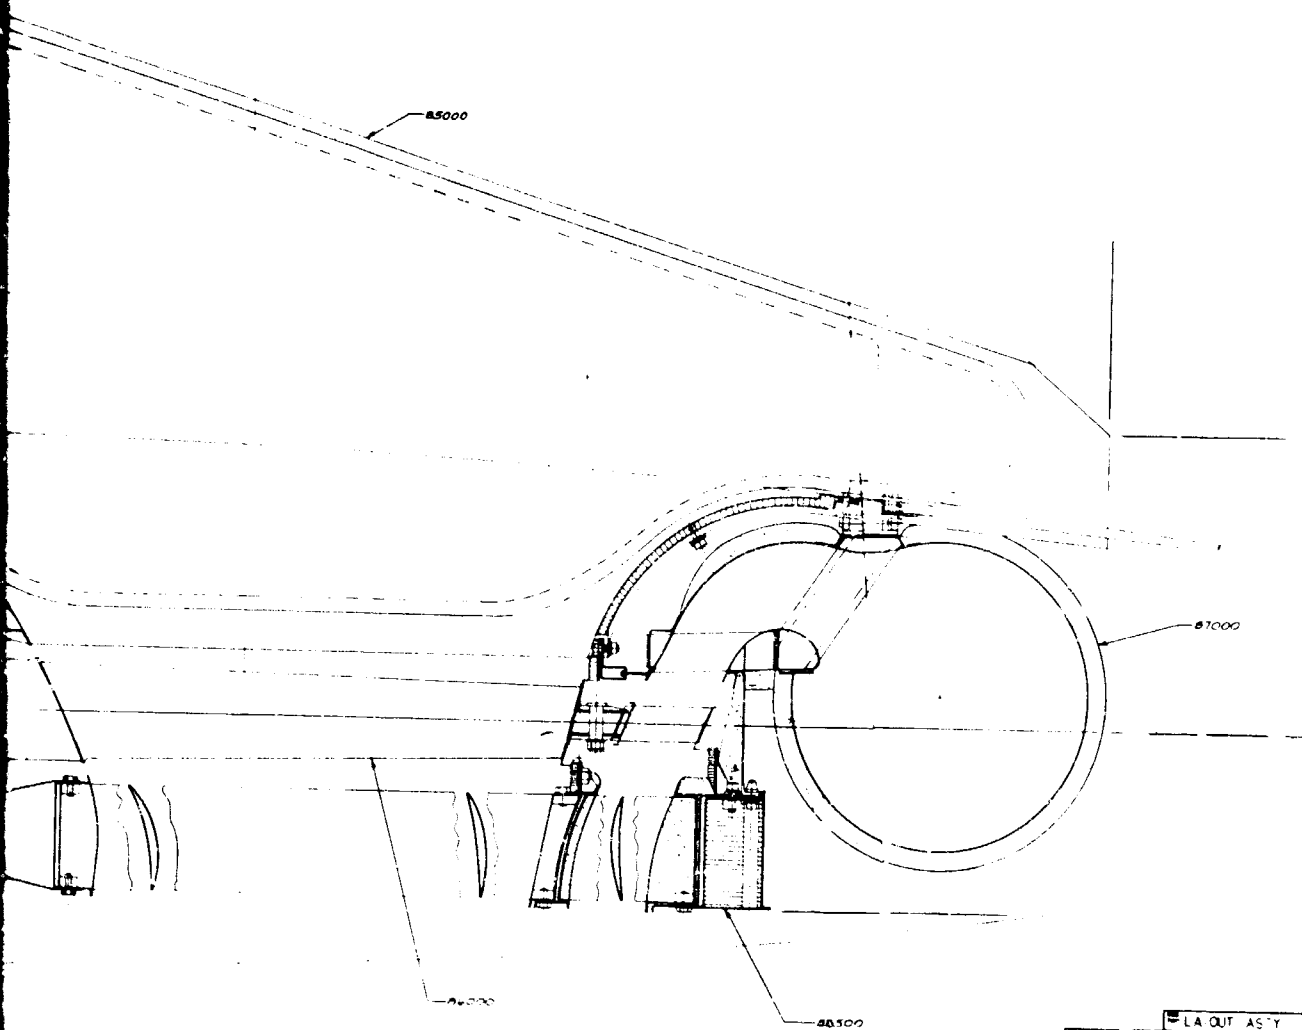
(U) LFX-6 Chordwise Section Assembly.
